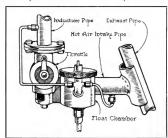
Bypass Device for Attachment, to Float Chamber of Carburetor, Designed for Easy Starting of Motor, Etc.
